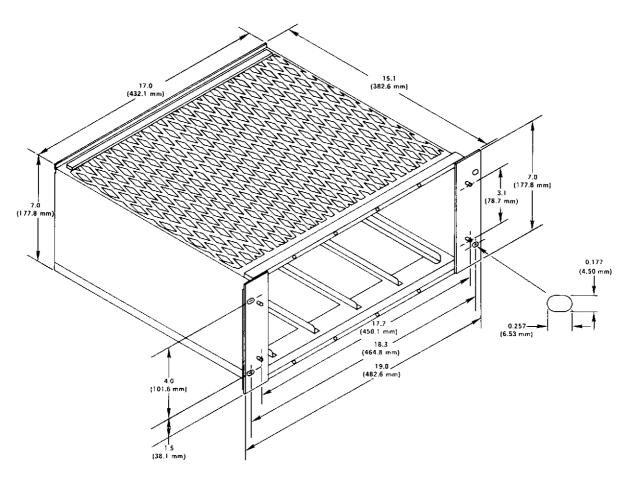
Dimensions of the Q4001A Mounting Cage in Inches (mm)
